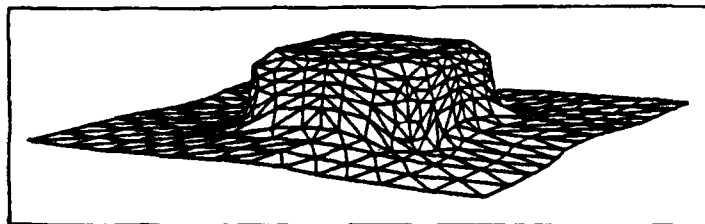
Square-Cup Drawing Process Simulated by Three-Dimensional Sheet Program.
